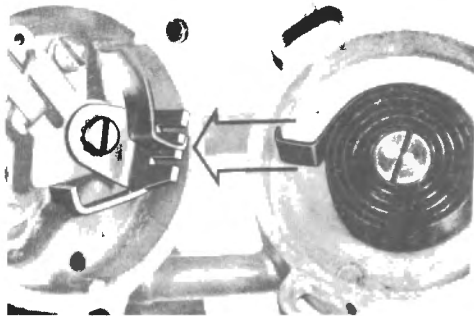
Choke thermostatic spring setting - FoMoCo
